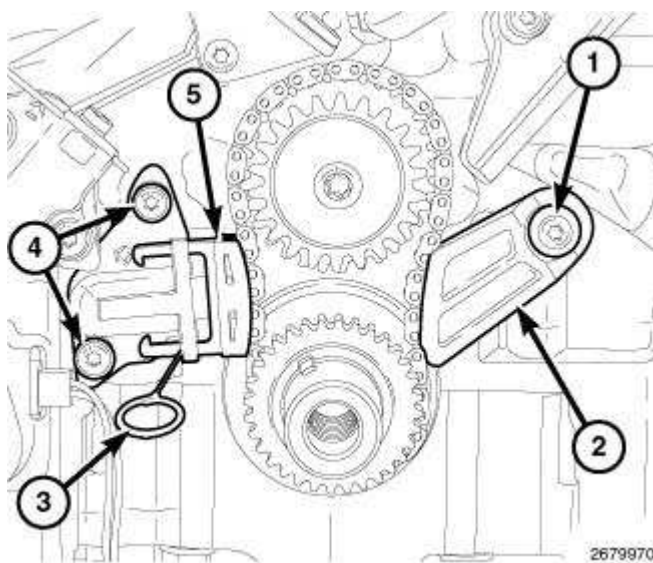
Primary Chain Tensioner, Tensioner Pin, Primary Chain Guide & Bolts
